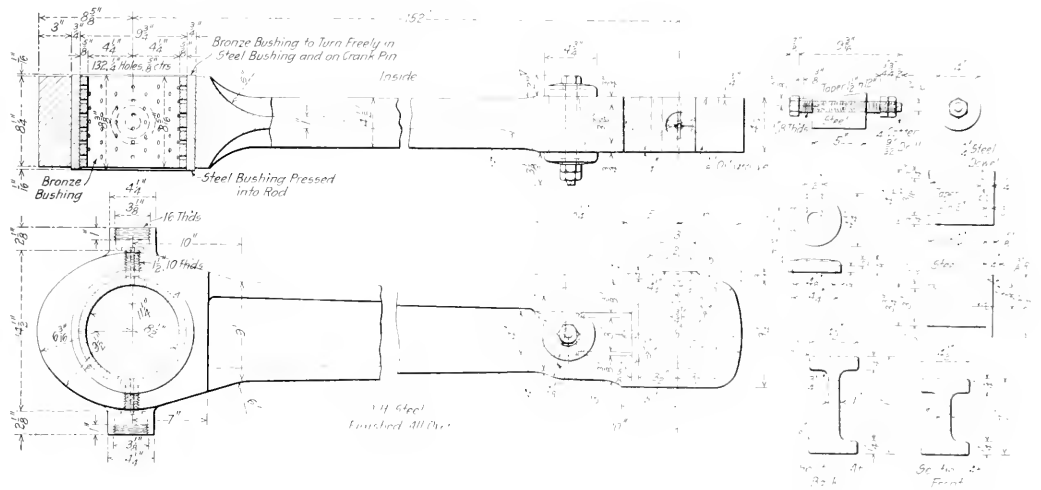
Main Rod Used on Chesapeake & Ohio Mountain Type Locomotive
